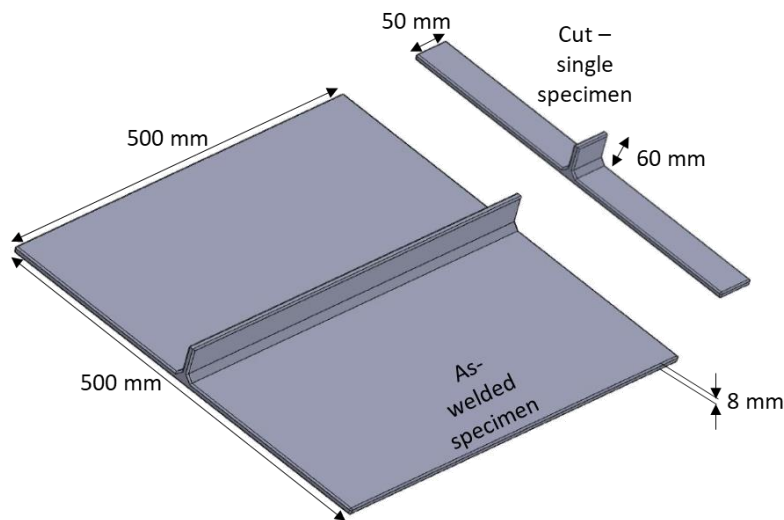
Schematic of Experiment Set 2 specimen. Left - as-welded; right - after specimen cutting.
